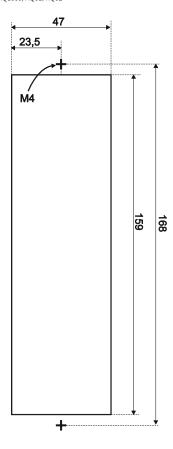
AQ101 cut out for panel mounting, scaling in millimeter.
